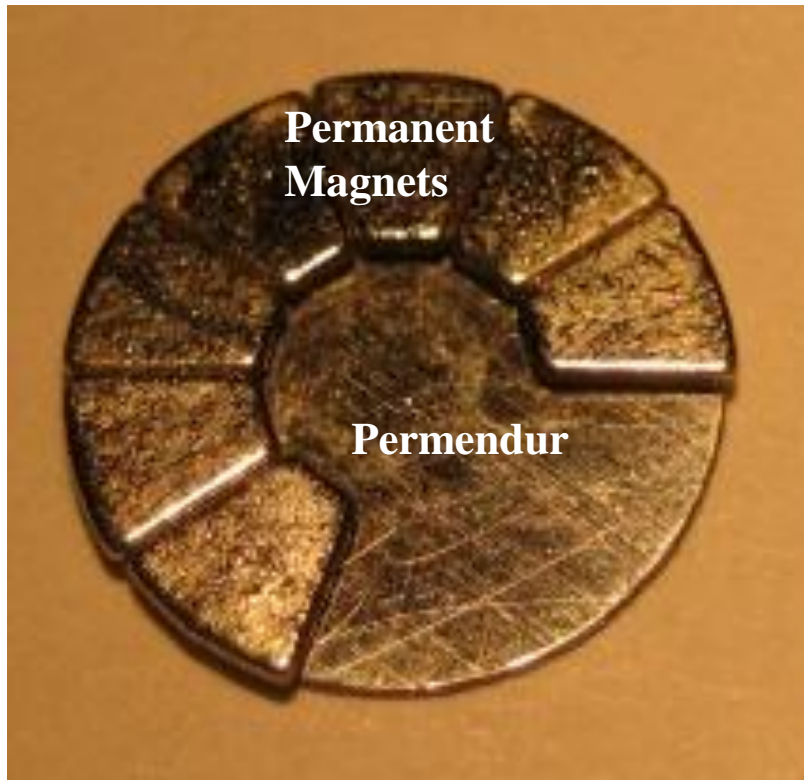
Picture of magnets assembled with alternating polarity on the permendur disc.
